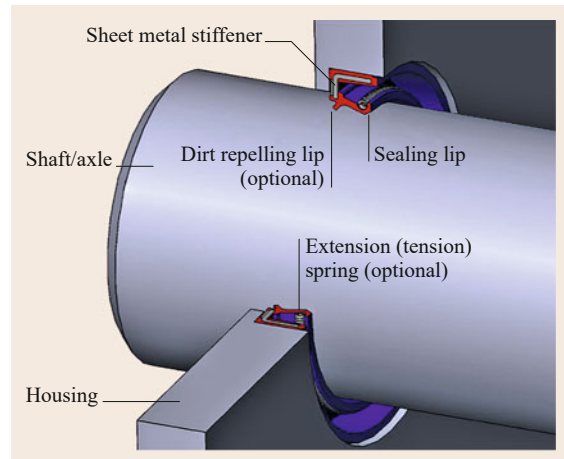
Rotary shaft lip-type seals with dirt repelling lip
